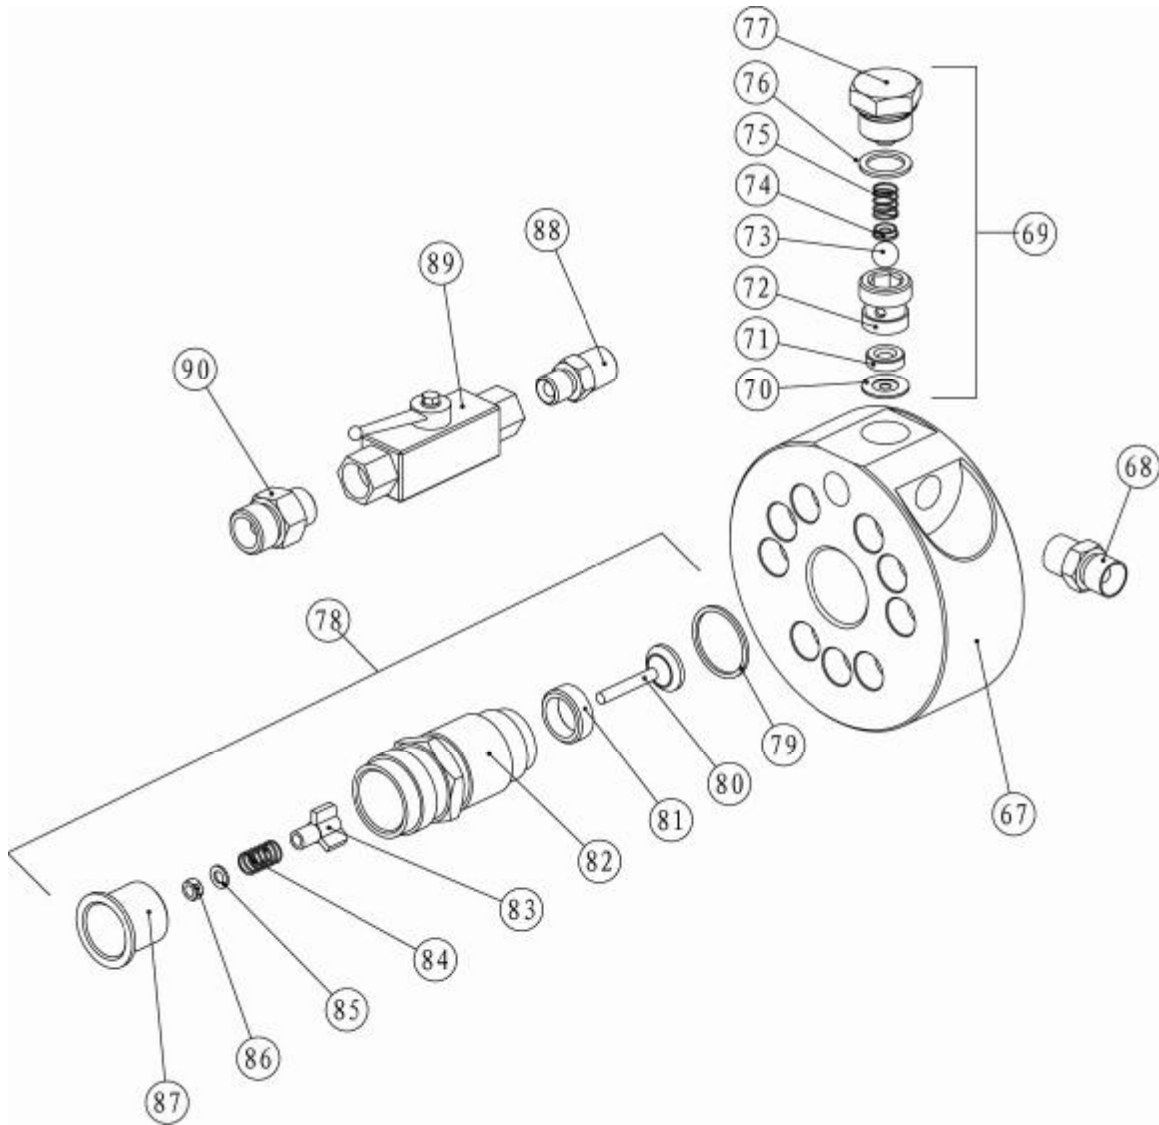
THE EXPLODED PARTS VIEW FOR THE VALVE BLOCK ASSEMBLY
